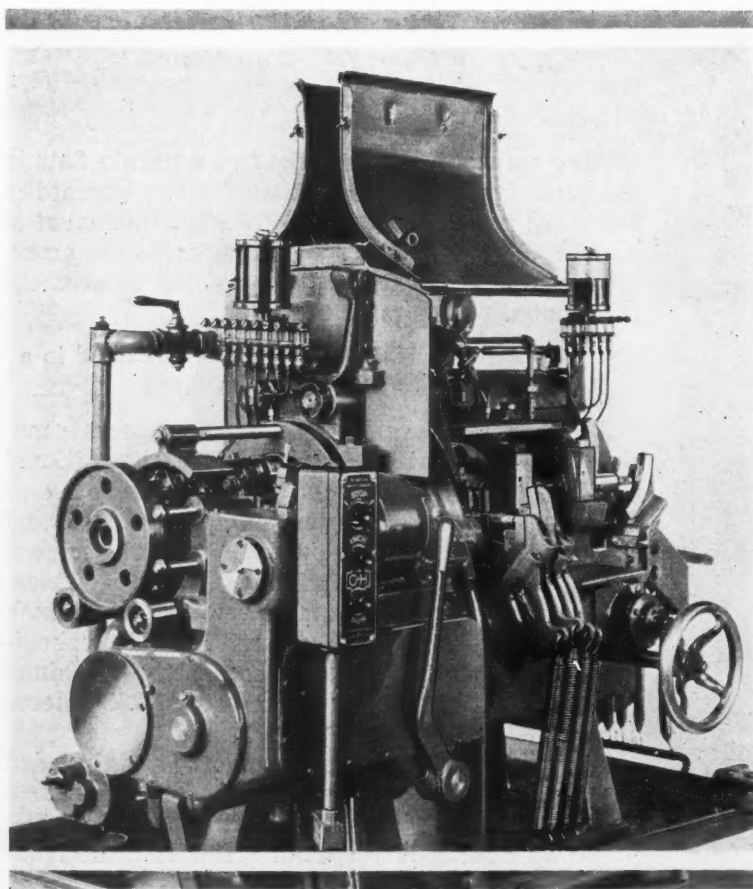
Davenport Automatic Screw Machine with Attachment Designed for Machining Long Pieces — Parts Shown in Fig. 5 are Produced in from 6 to 10 Seconds
